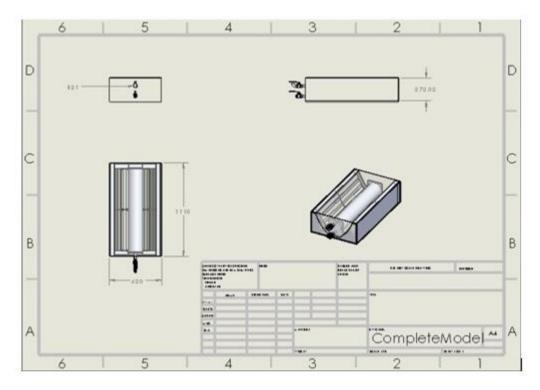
Technical Drawing of Multiple Linear Facets ICSSWH
